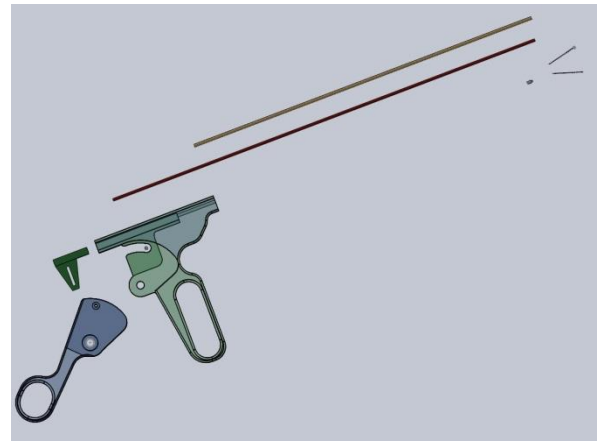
CAD Drawing of the Minimally Invasive Surgical Device.
